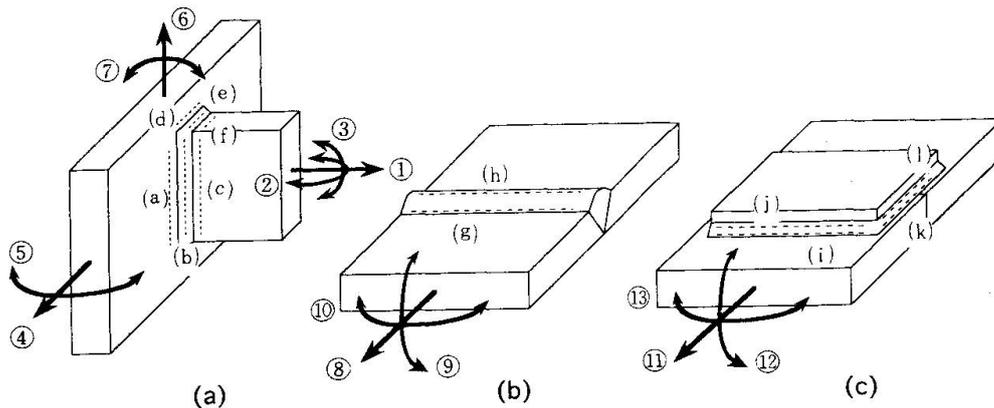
Joint Action and Cracking Modes on Typical Joints; (a) Tee Joint; (b) Butt Joint; (c) Lap Joint
